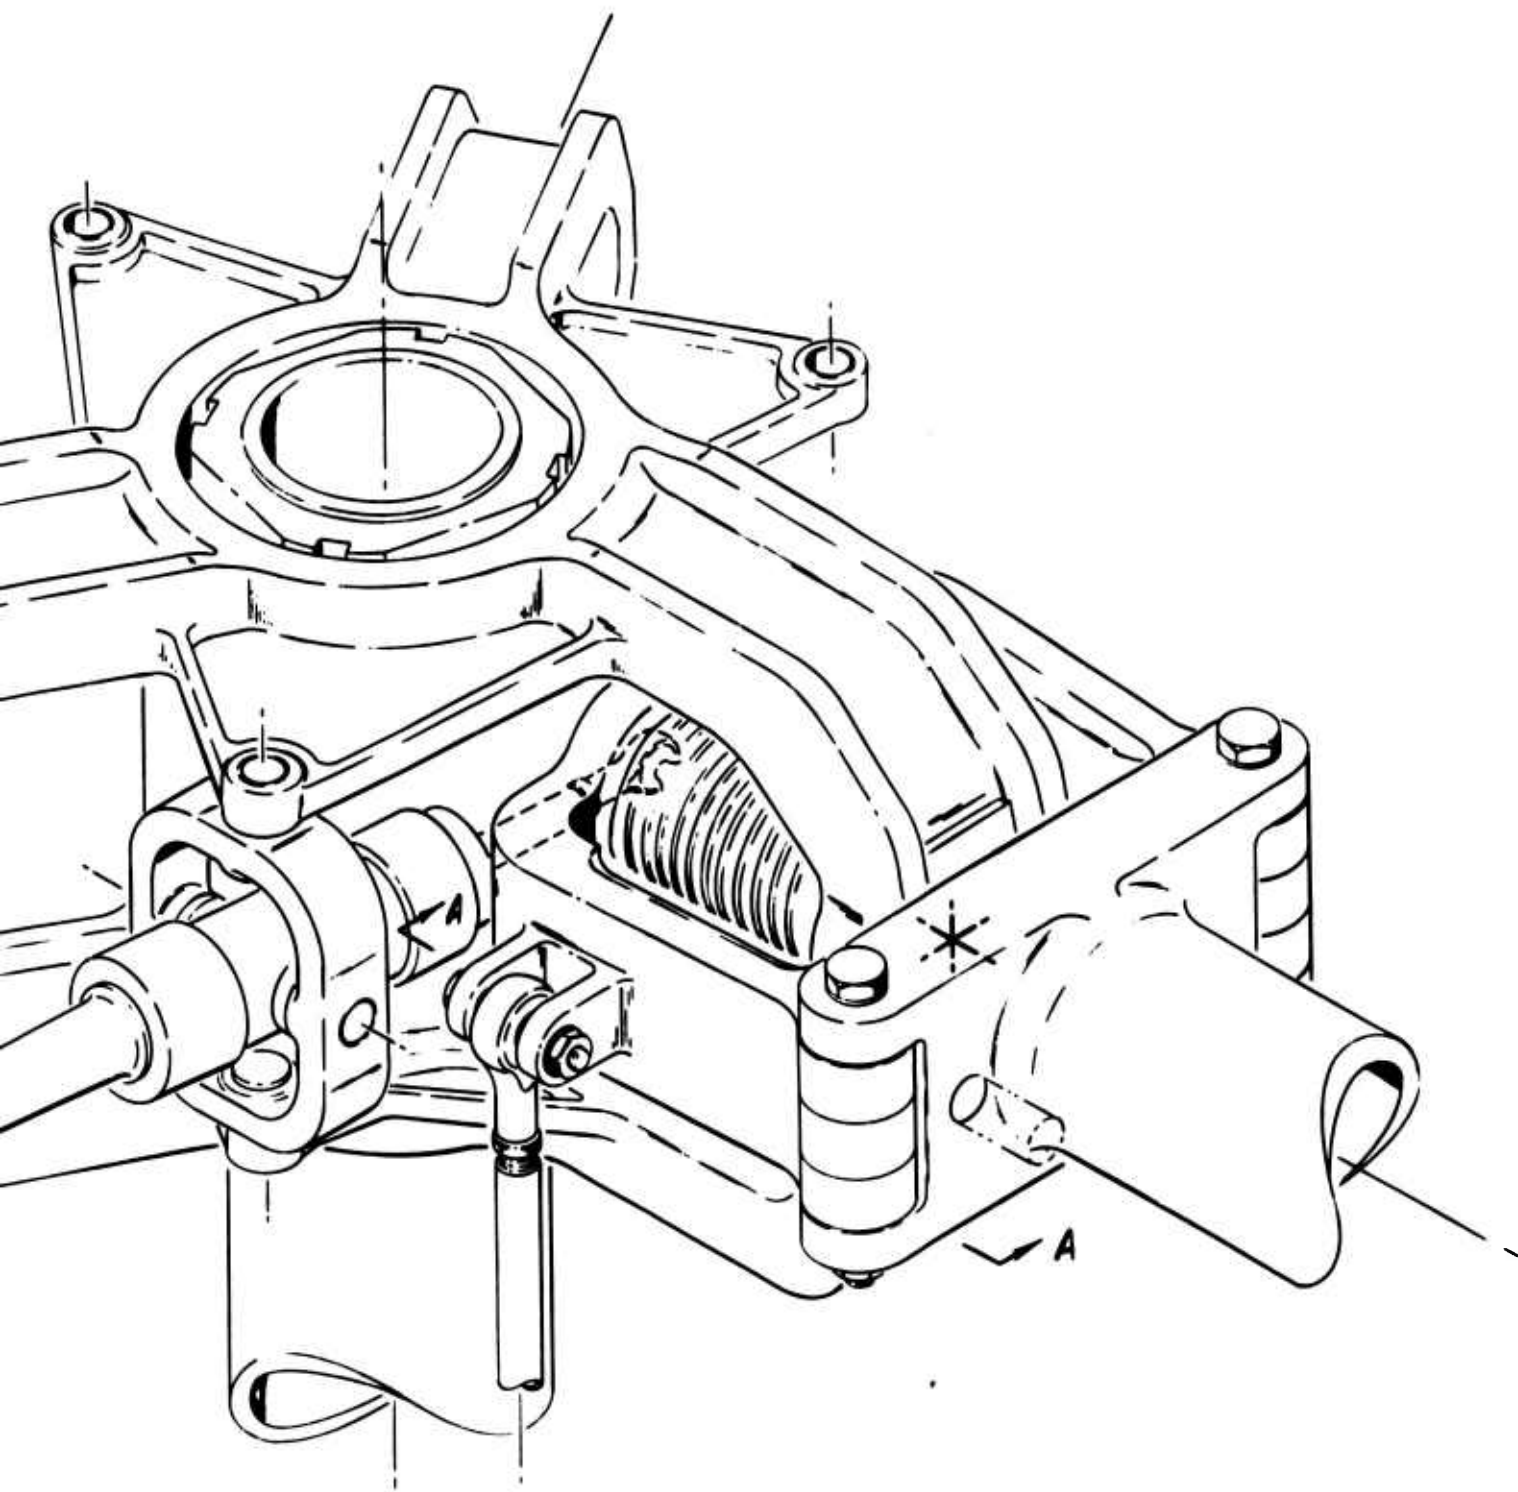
Coincident-Hinge Elastomeric Bearing Rotor Hub.
